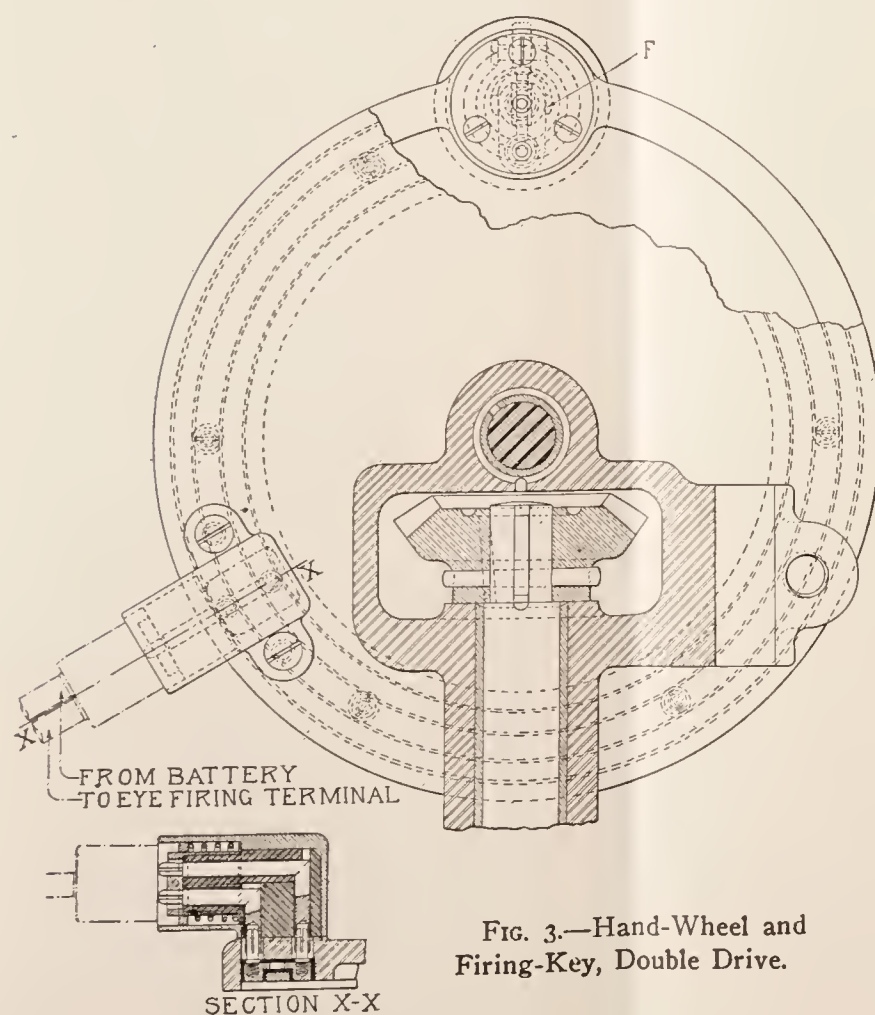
Hand-Wheel and Firing-Key, Double Drive.
